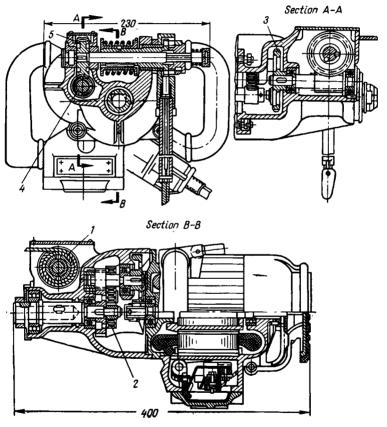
3PΠ-6 (ERP-6) hand-held electric drill
